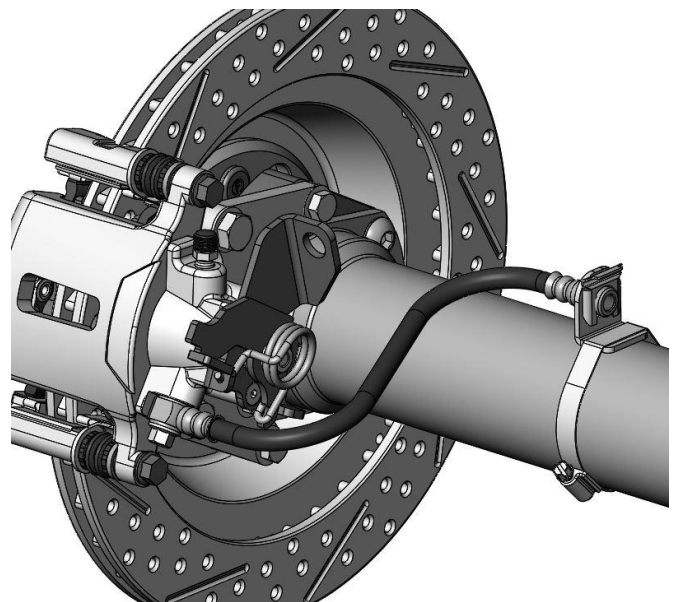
Brake Hose Attached at the Rear Axle Housing
